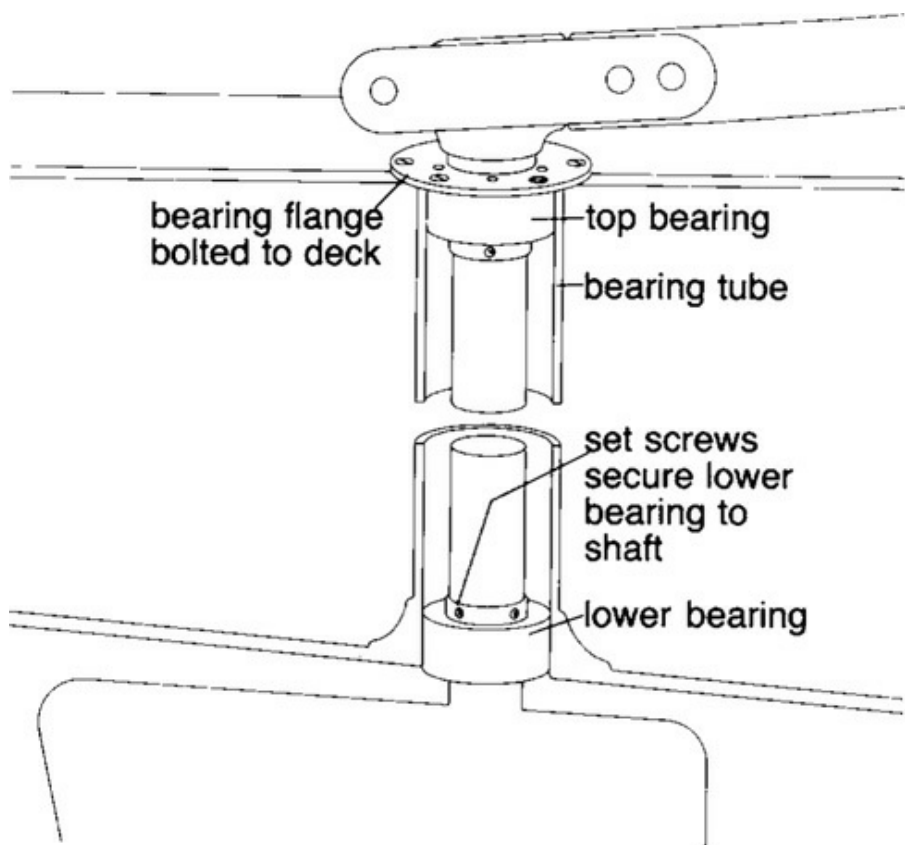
C. Typical support bearings for a rudderstock with a top bearing. The top of the bearing tube is sealed to the deck. (Jim Sollers)
